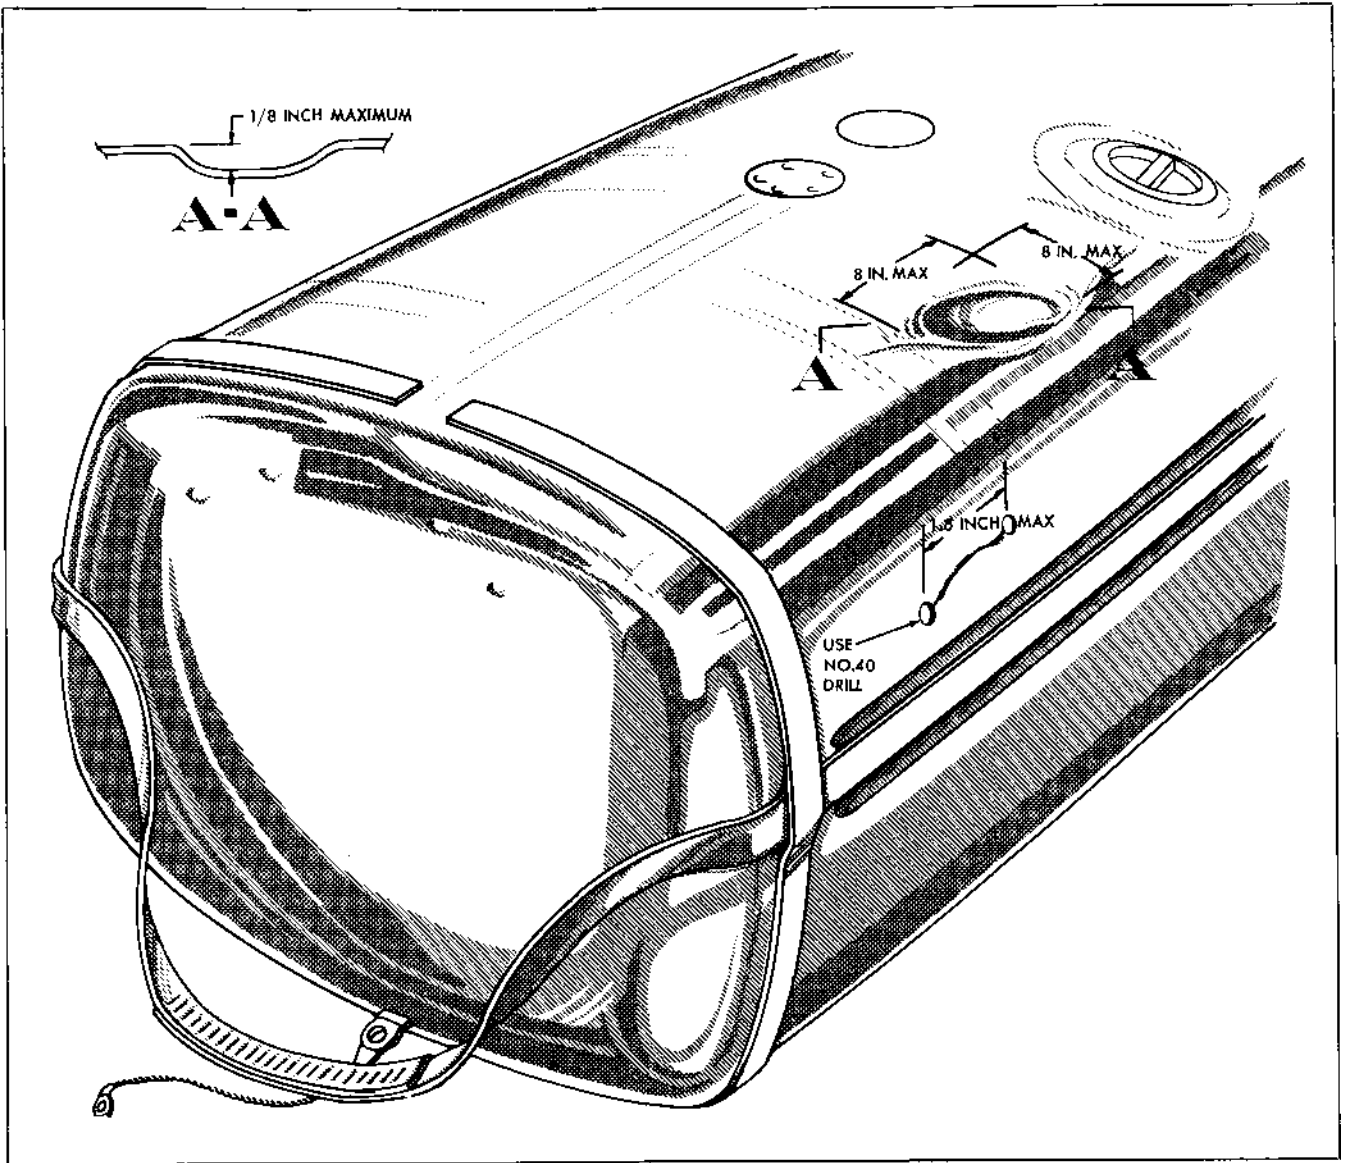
A — REPAIR TO WELDED FUEL TANK
